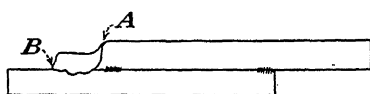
Poorly made lap weld. A, top plate undercut; B, heavy rolled edge.
